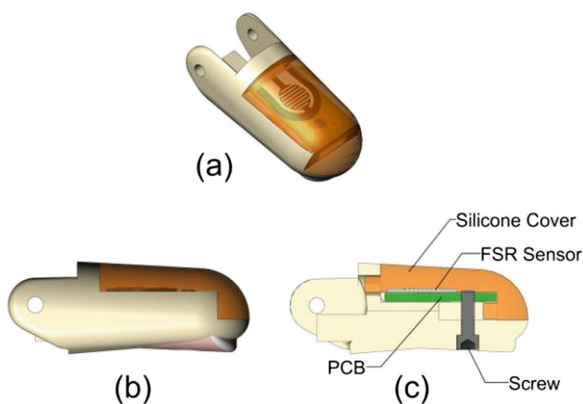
CAD model of a distal finger phalange incorporating an FSR sensor in: a perspective view, b side view, and c cross-sectional side view
